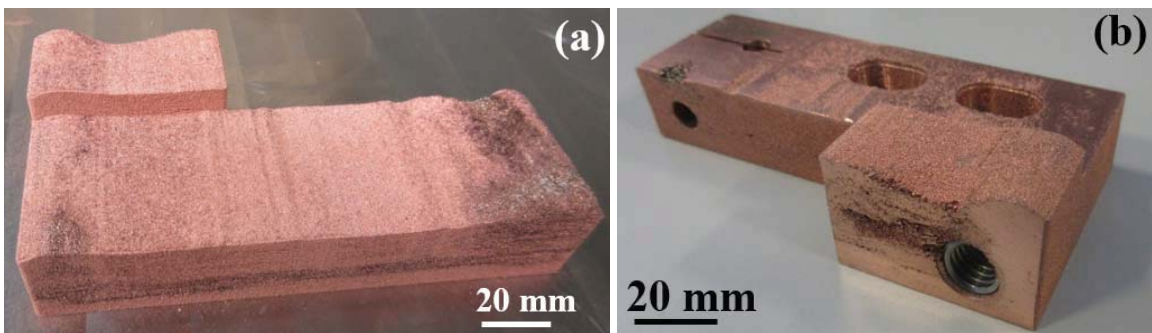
(a) Printed Upper Electrode Holder Prior to Machining, (b) After Machining
